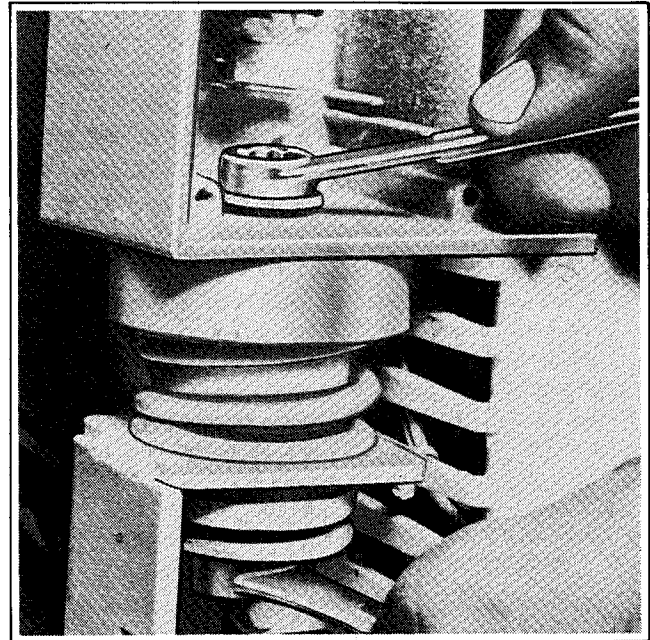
Locking Brushes and Removing Speed Sensor
